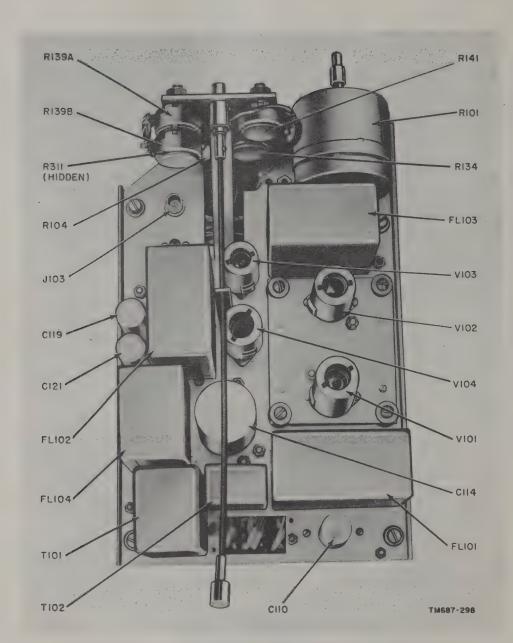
Transmitter base-band amplifier plug-in assembly, top view.
